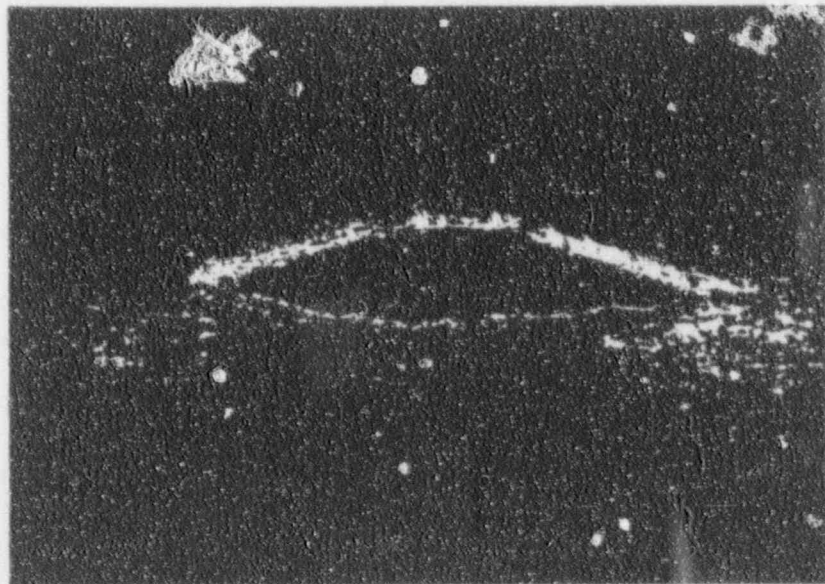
Tube R96L116 EC2 Burst Test Specimen After Test.
